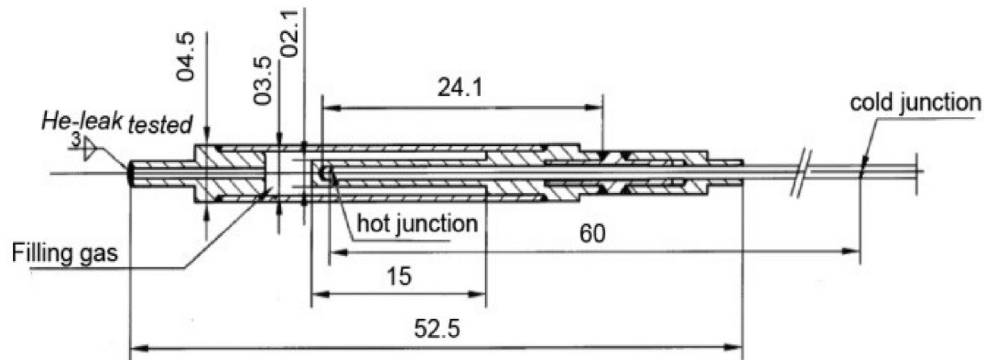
Schematic view of the GT built by SCK-CEN and its dimensions in millimeters [10].
